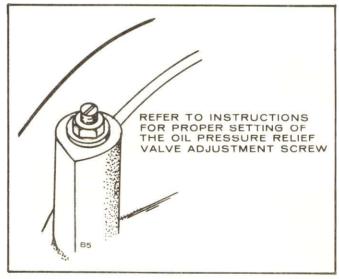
OIL PRESSURE RELIEF VALVE ADJUSTMENT
